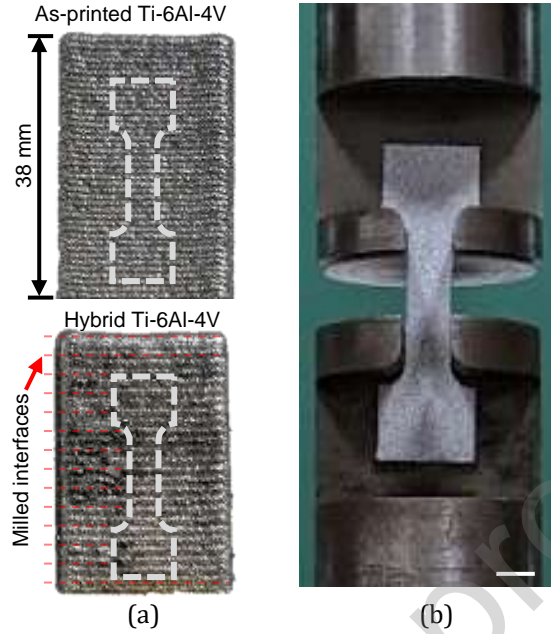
(a) Tensile test specimens and (b) specimen held by grips during testing.
